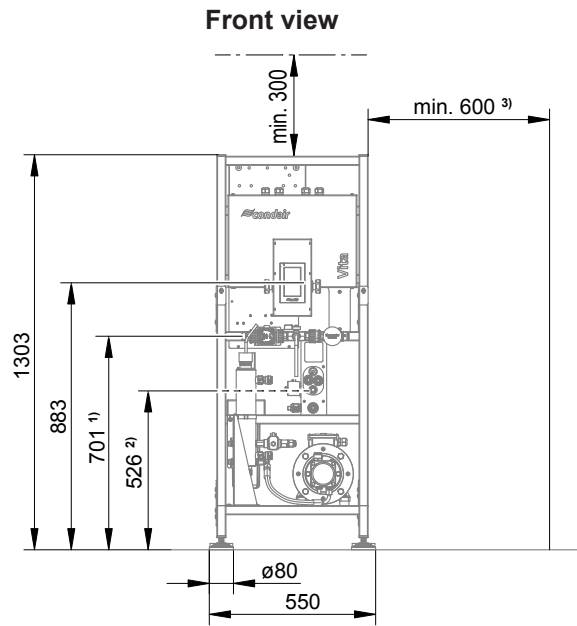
System dimensions Vita Power RO-UV-HP (dimensions in mm)
